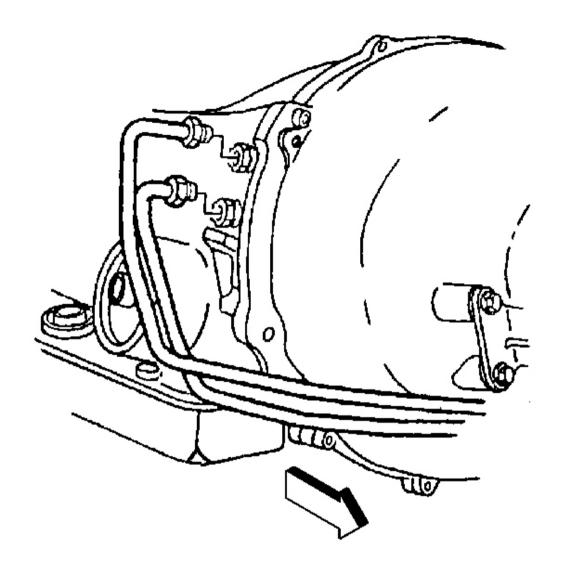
Driveline Support Assembly, Bolts & Studs Courtesy of GENERAL MOTORS CORP.
